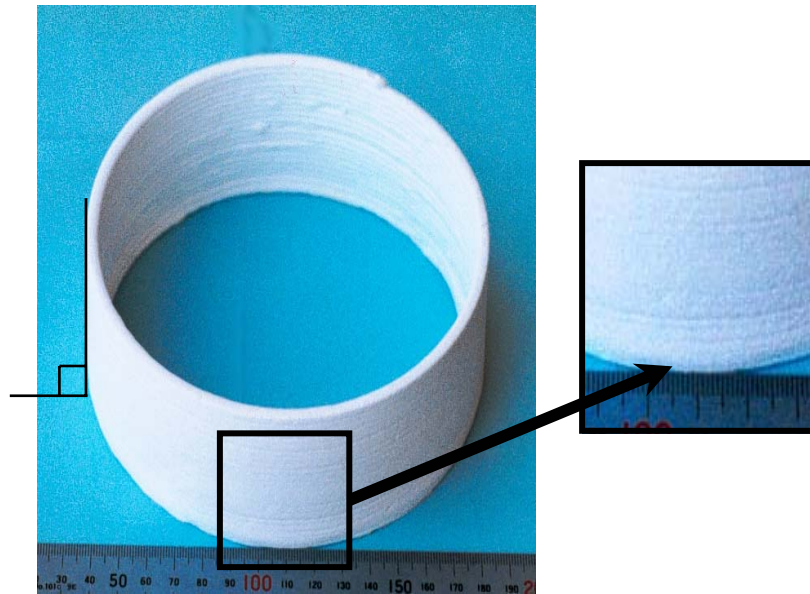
Plaster part after extruded using heating and wetting to improve profile and surface finish, respectively
